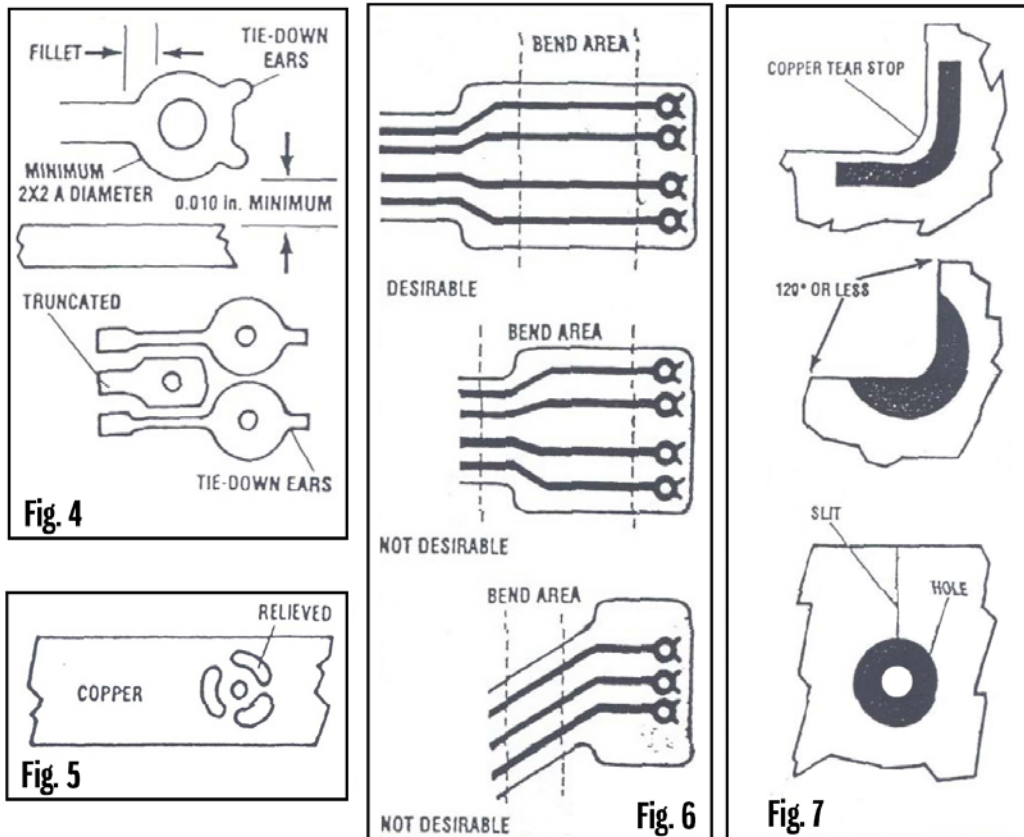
Pad geometry standards. Figure 5: Pad relief geometry. Figure 6: Bend and fold geometry. Figure 7: Tear stops.
